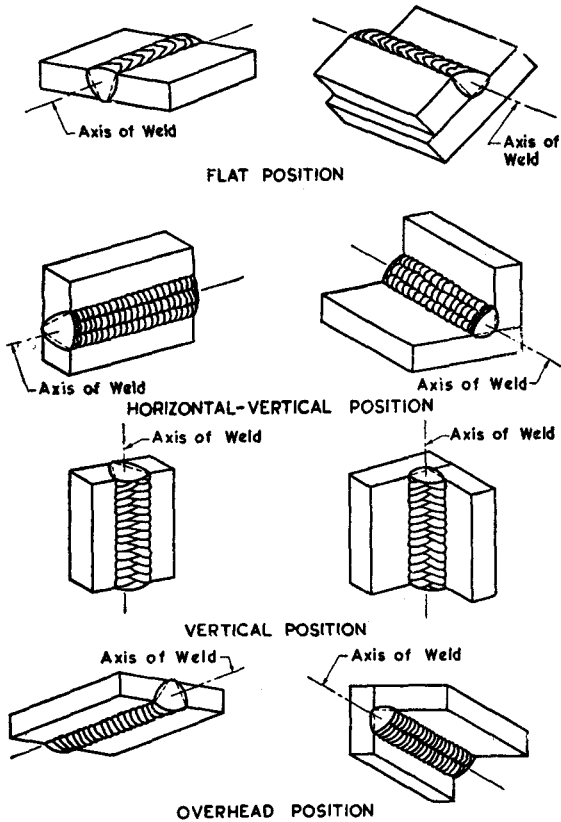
LONGITUDINAL AXIS OF WELDS
